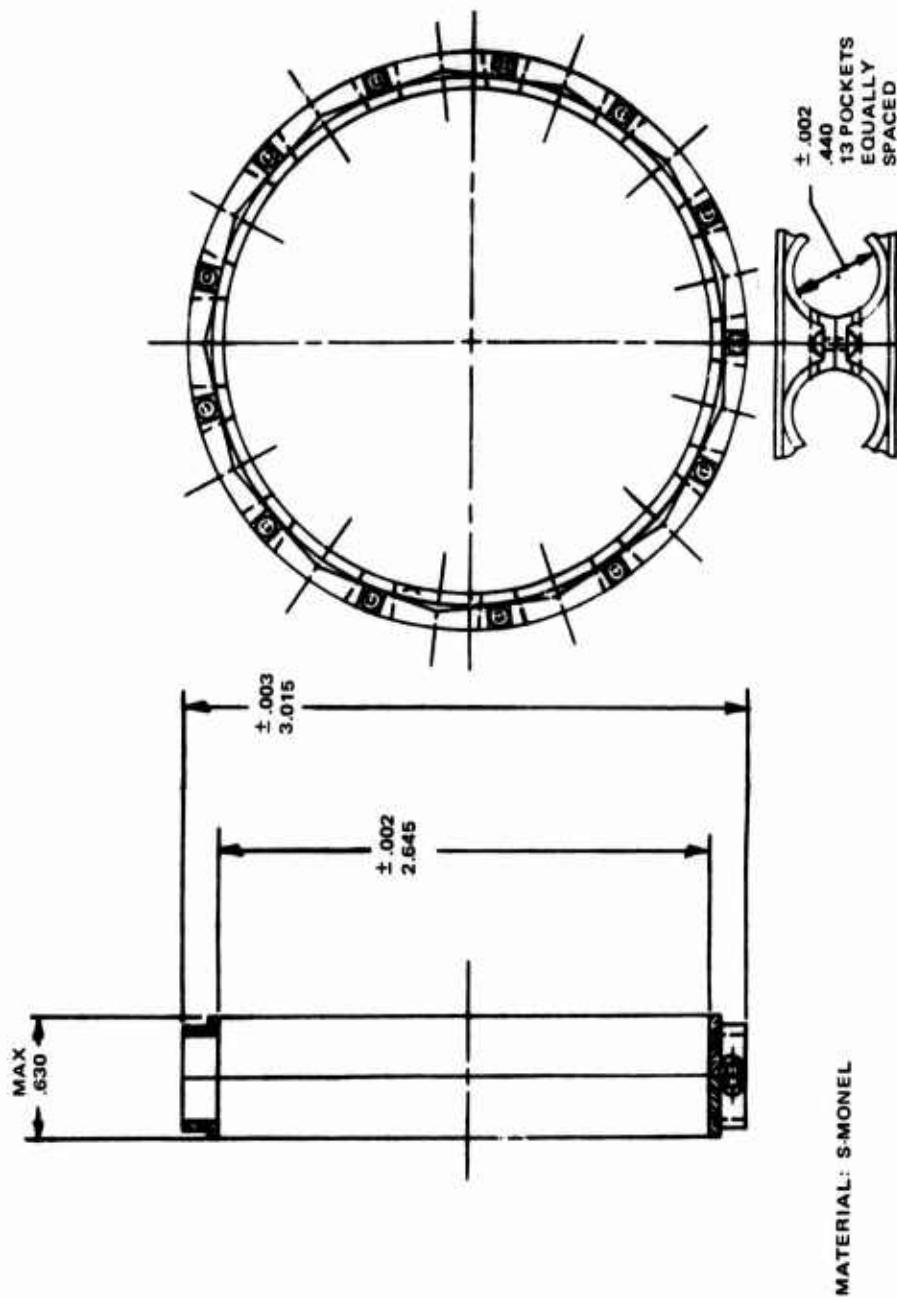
Machined Inner-Land-Riding S-Monel Cage, Design 2.
